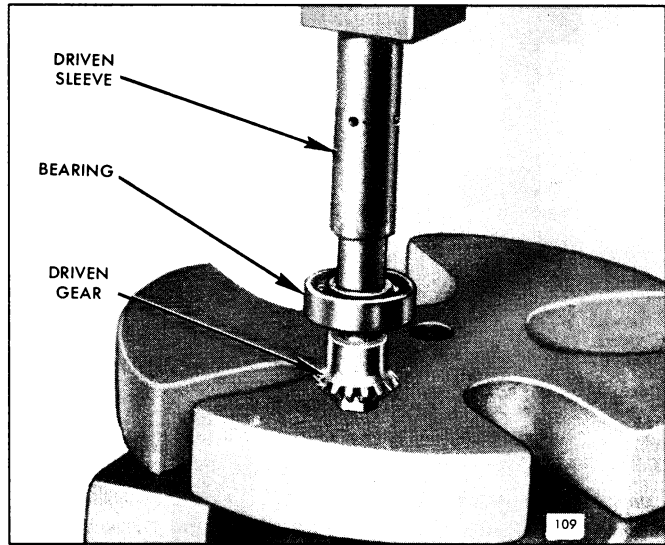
Installing Bearing and Sleeve on Driven Gear
